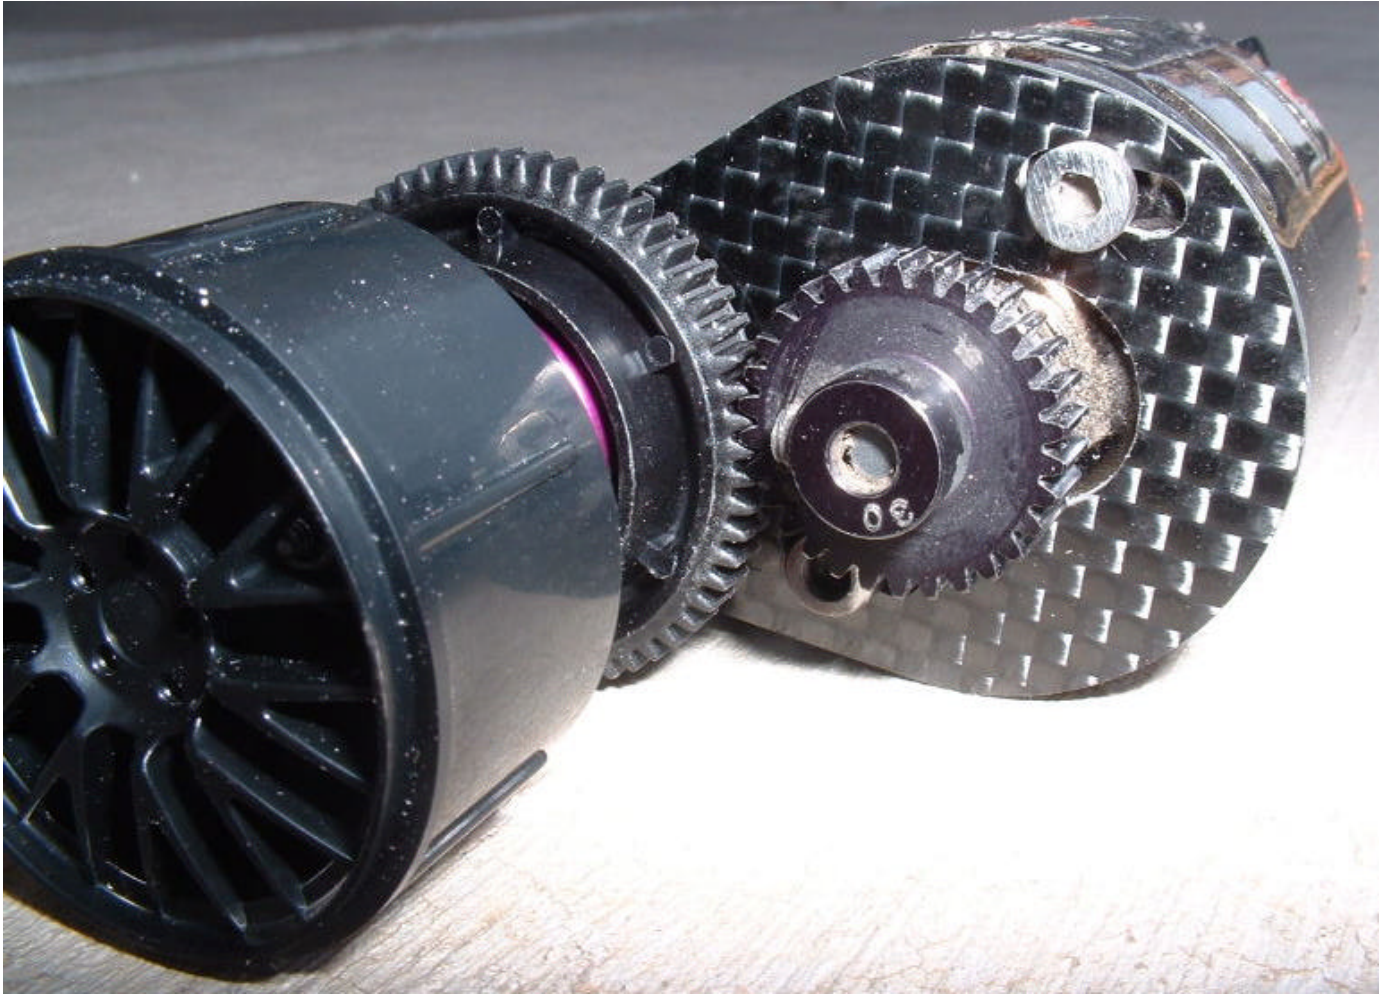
Picture of a 30-tooth pinion gear meshing with the 58-tooth spur gear. Notice the reverse orientation of the pinion gear.
